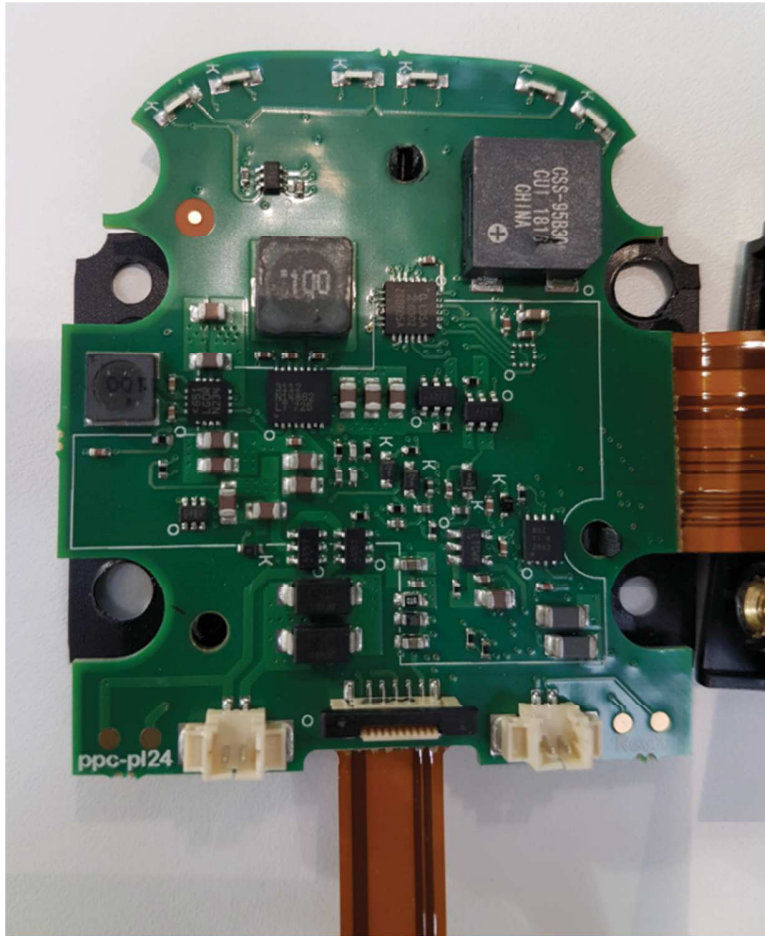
Front close up view of Radio Module removed from main housing with cover removed
